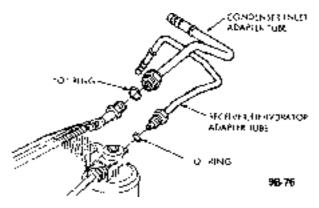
B-102 Condenser • Receiver • Dehydrator O-Rings. GT
